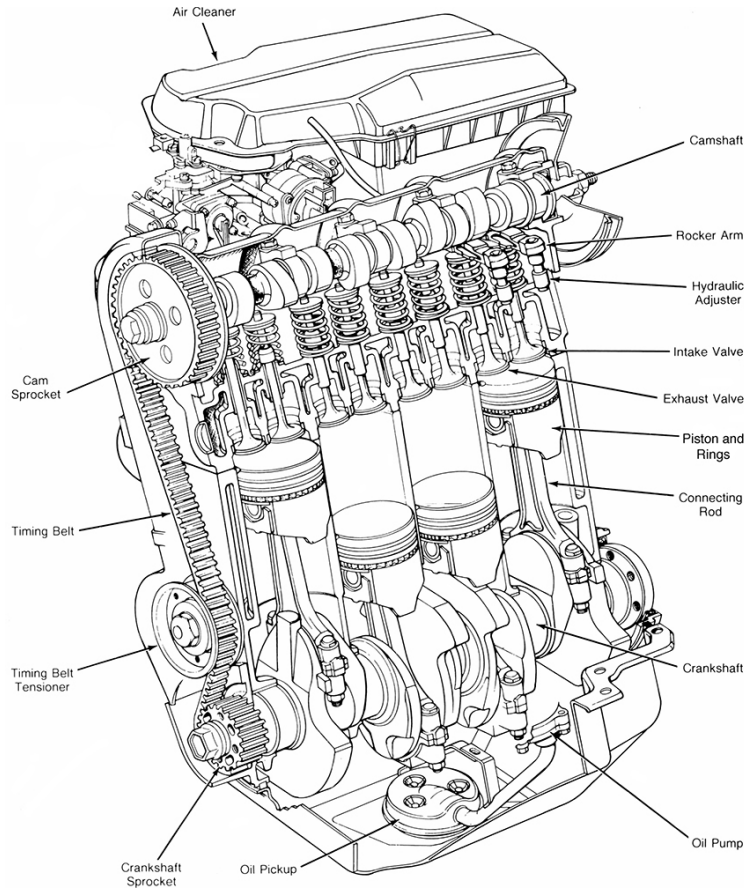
Main parts of a four cylinder spark ignition internal combustion engine [92].
